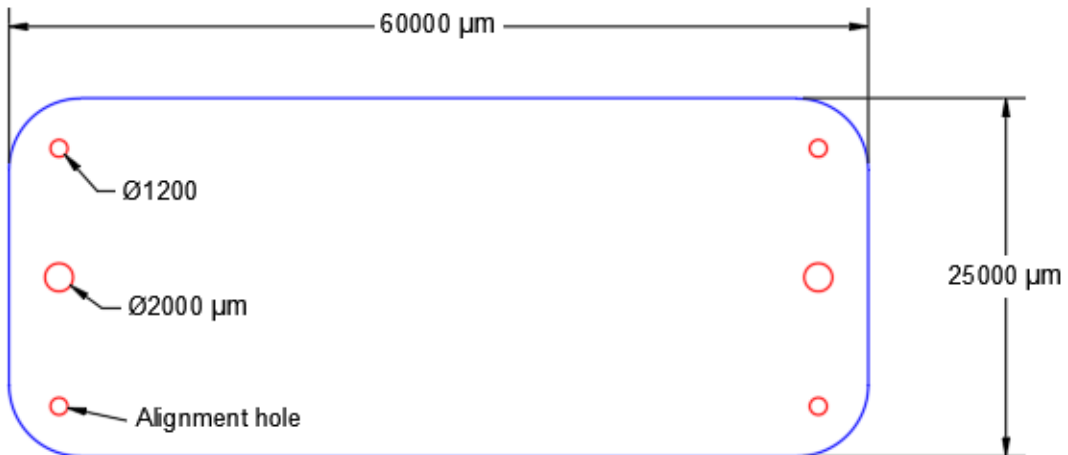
CAD design of top layer (two inlets-one outlet)
